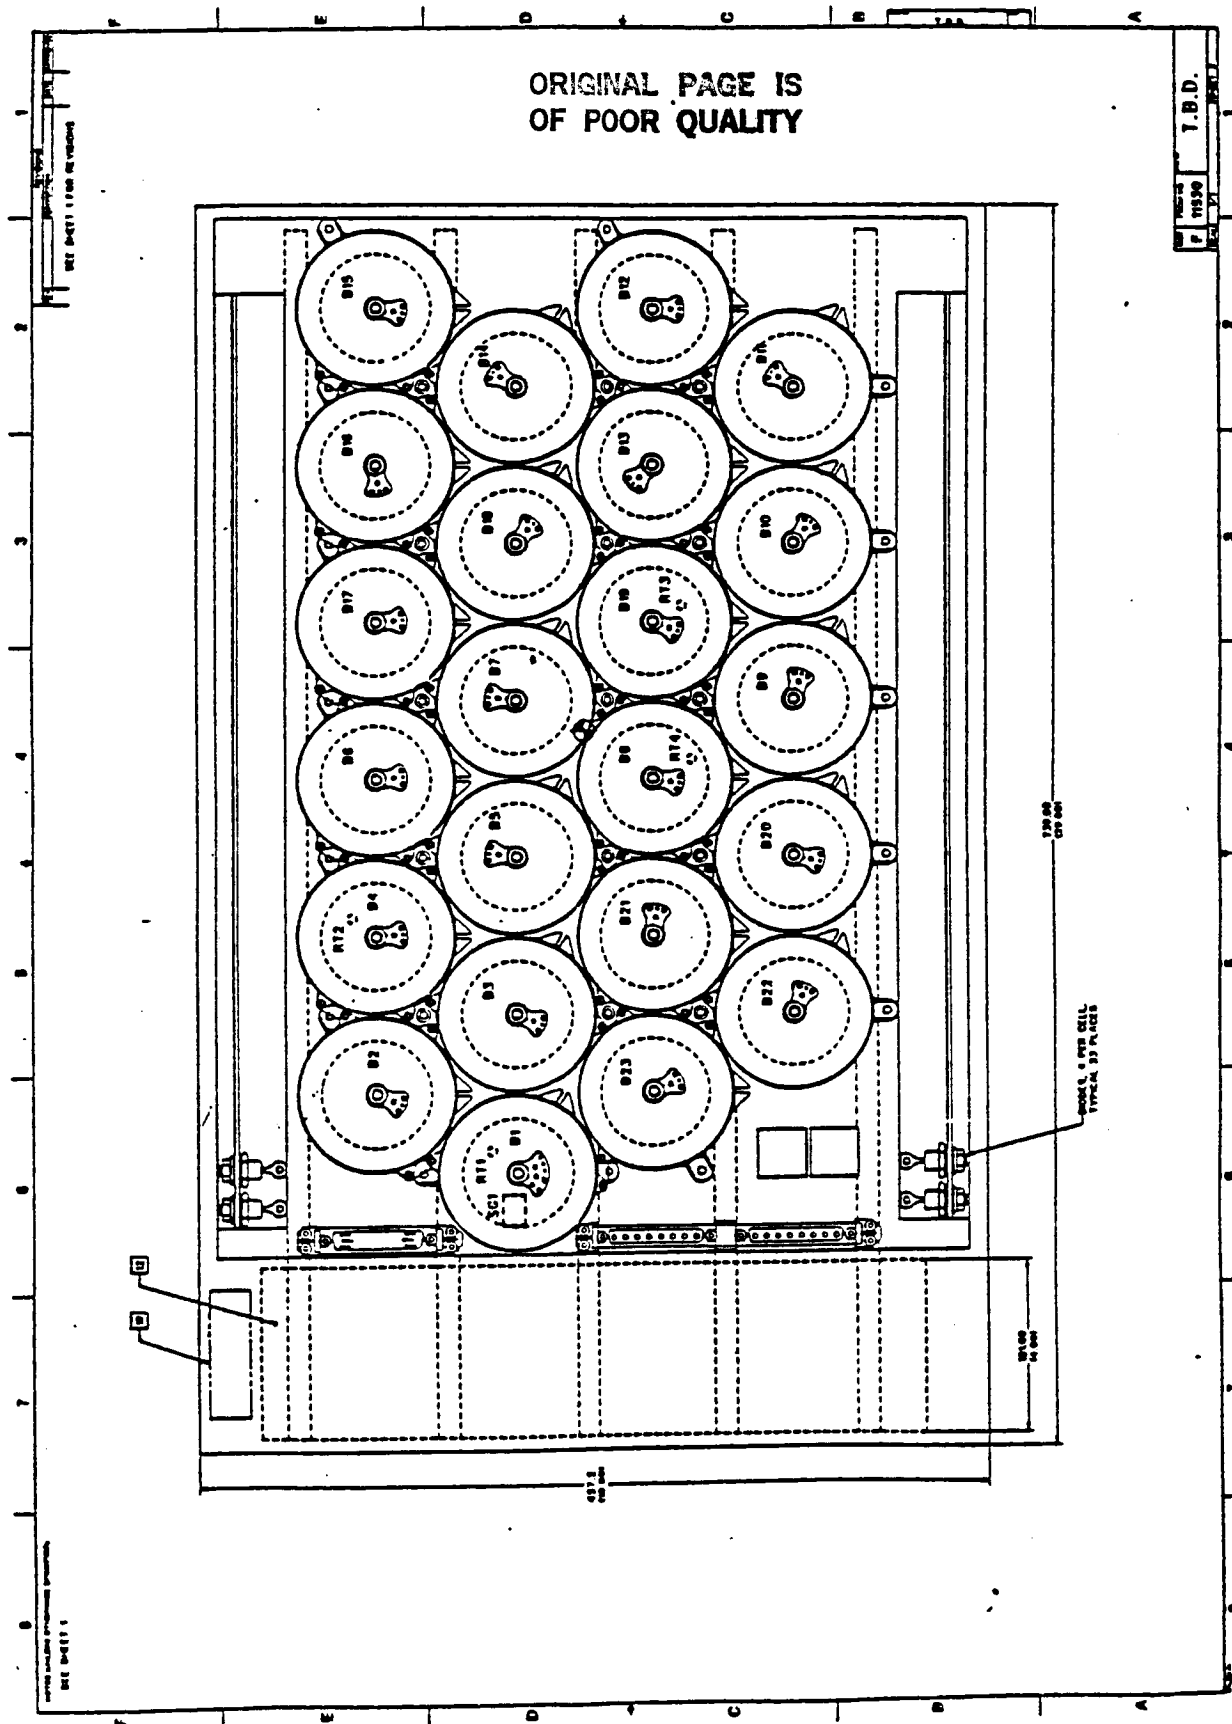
Battery Assembly Layout Drawing - View 2
